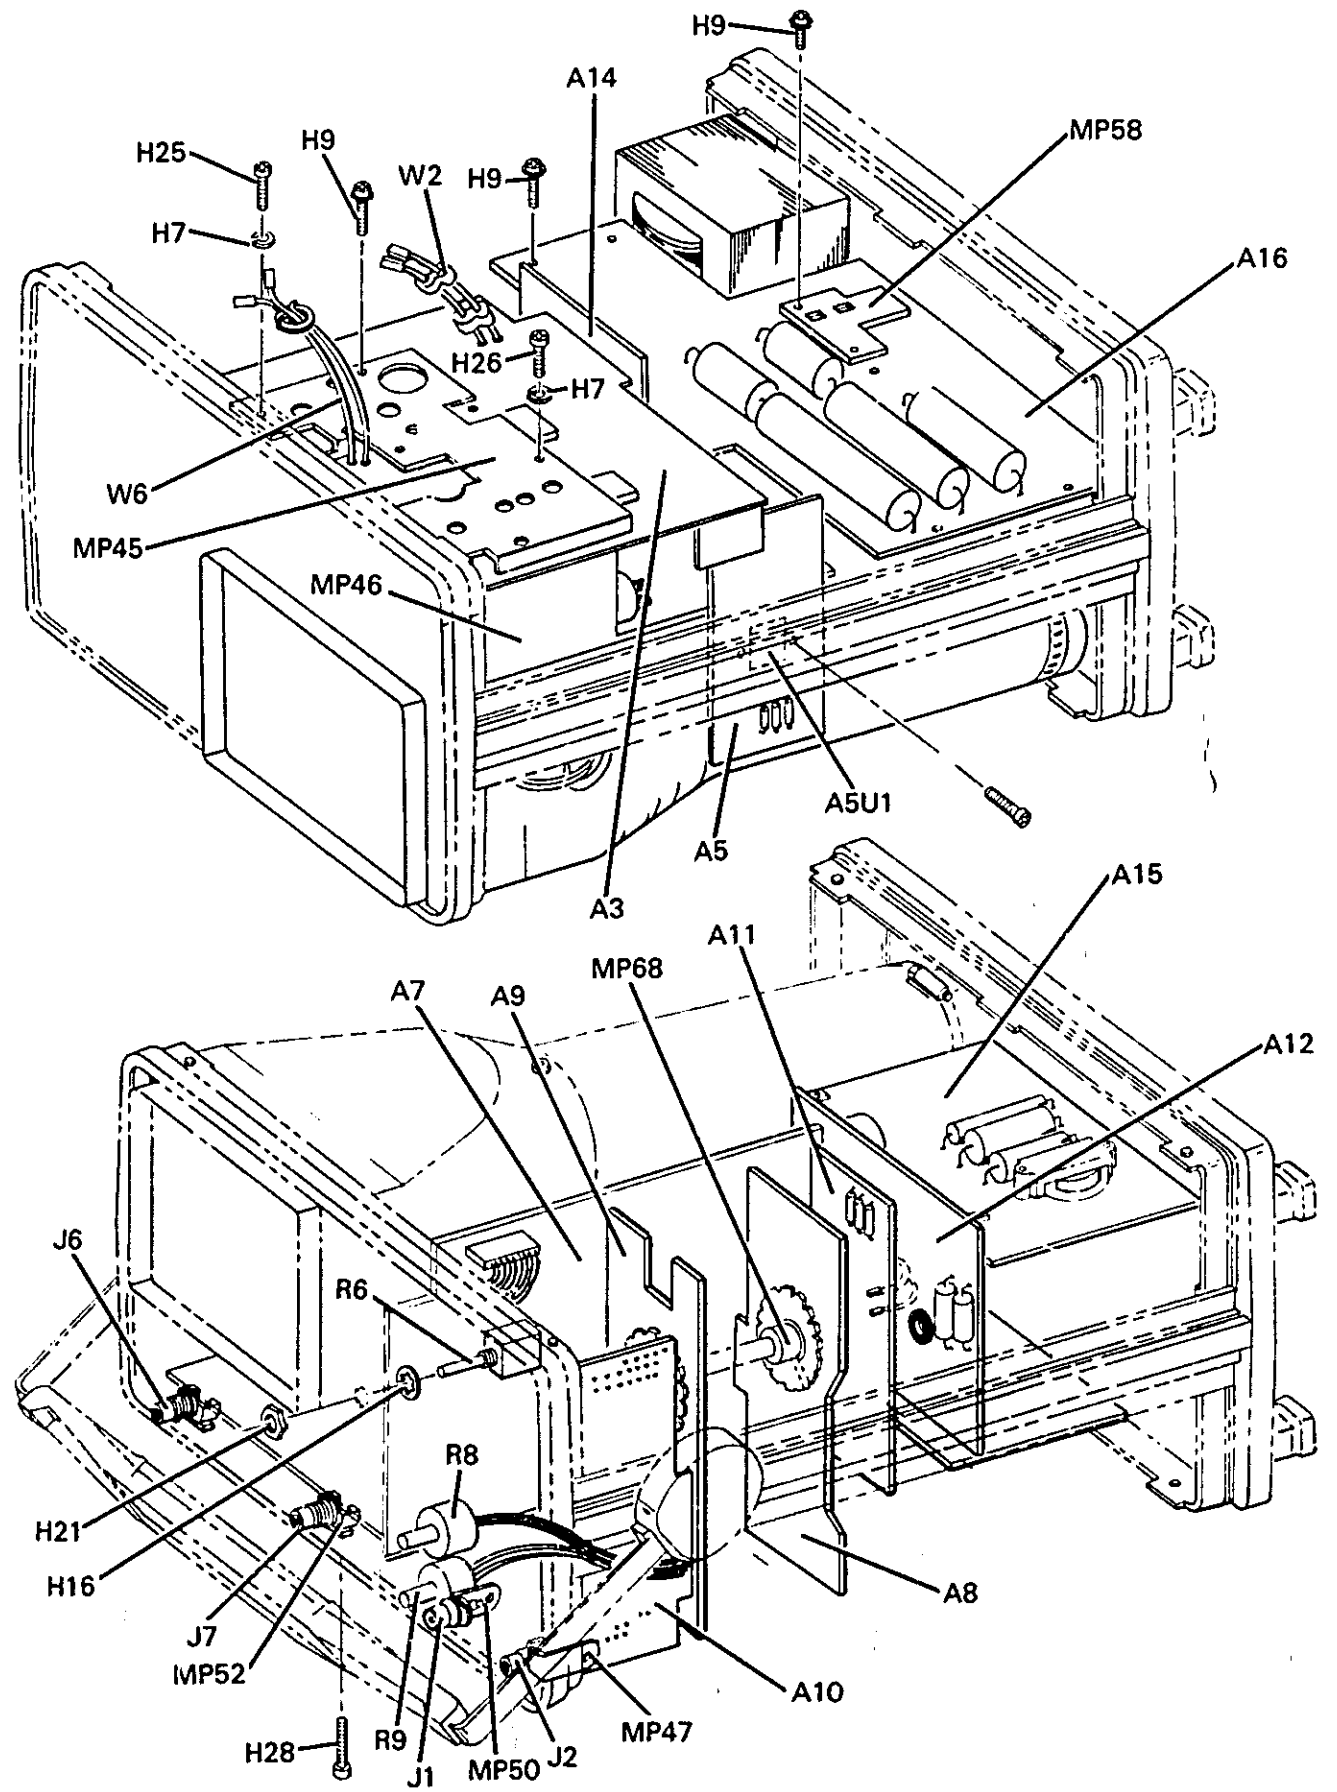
Chassis Parts and Board Assembly Identification (Sheet 2 of 2)
